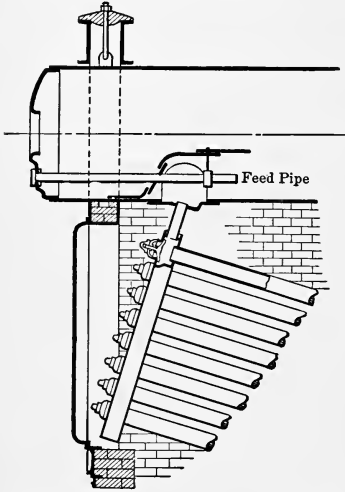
Front Section — Babcock & Wilcox Boiler.
